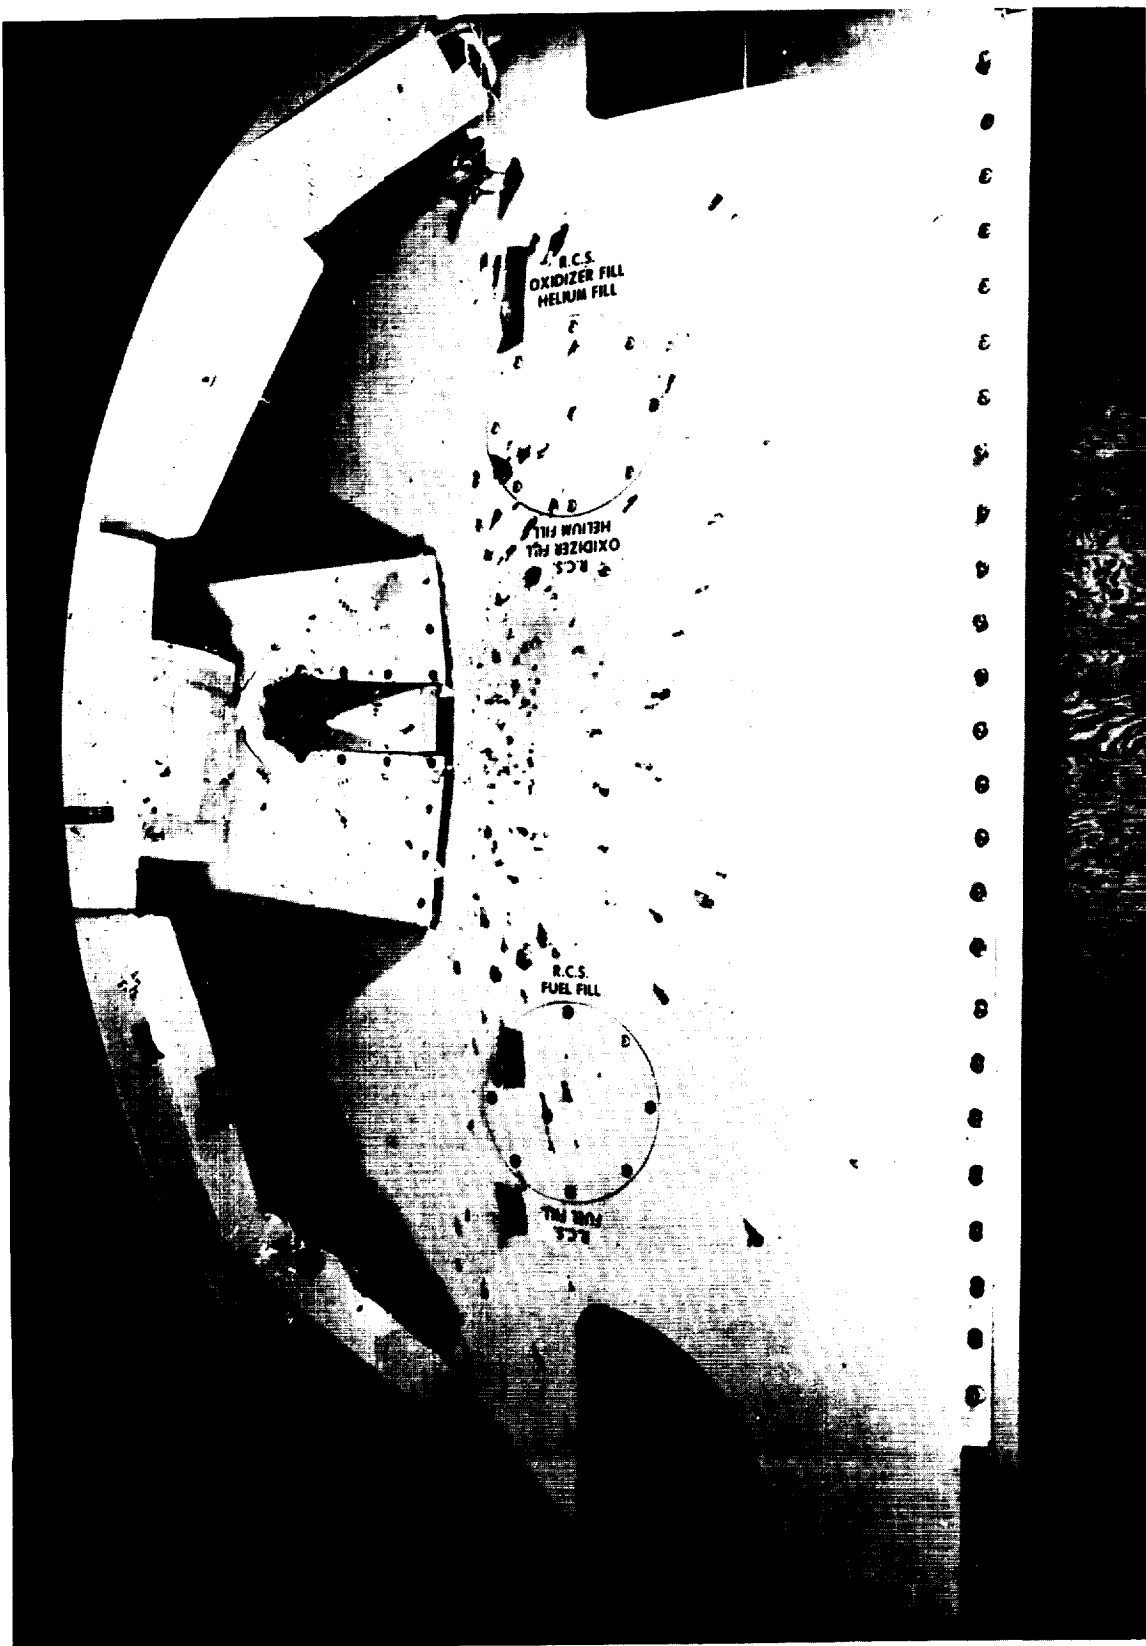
Resultant Damage to the Outer Surface of the RCS Panel by the Explosively Destroyed Molybdenum Combustion Chamber.
